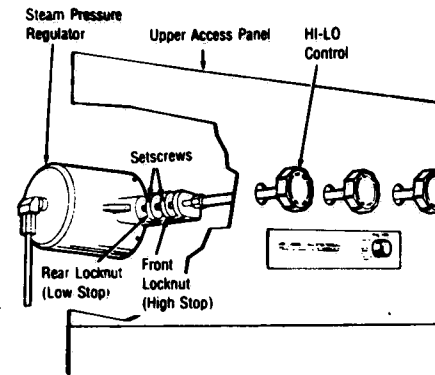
ADJUSTING PRESSURE REGULATOR.
